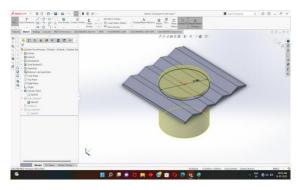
Remove the Inner Part by Using Cut and Extrude Command
